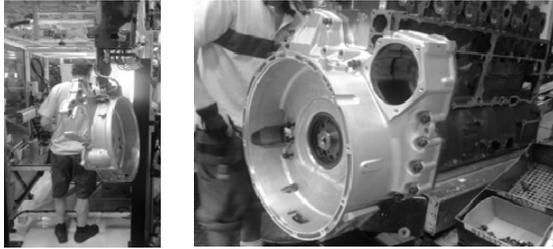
Assembly sequence: Lift flywheel cover, put cover in an automated silicon applying machine and aid the assembly operator when assembling the cover on engine block by carrying the heavy load.
